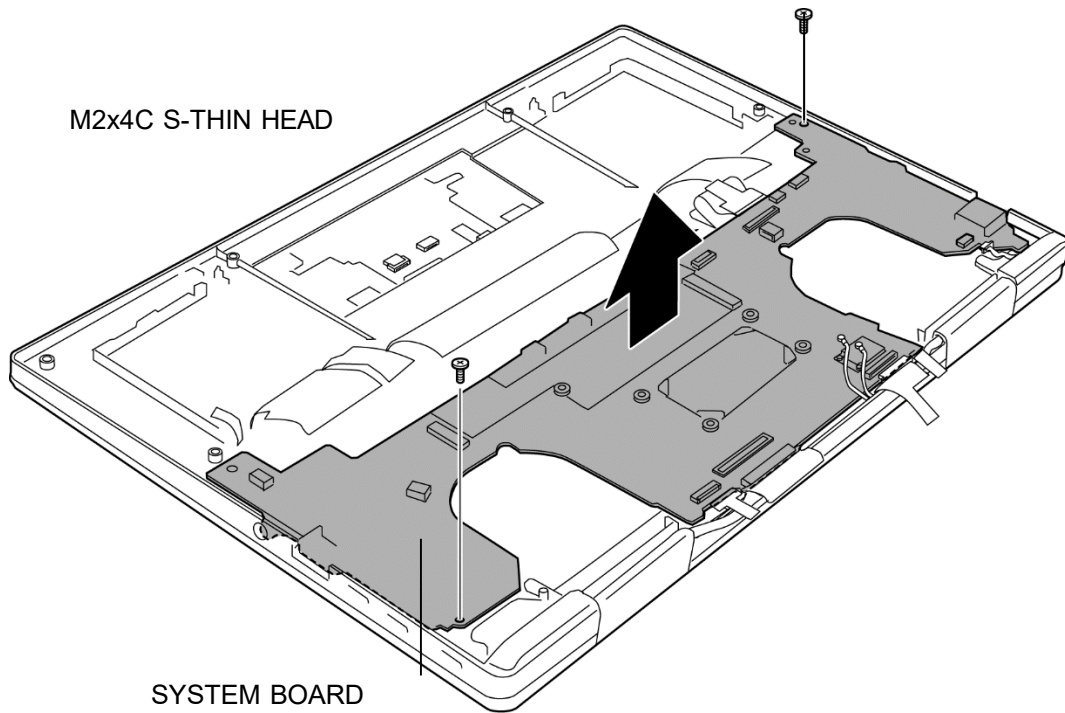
Removing the SYSTEM BOARD (1)
